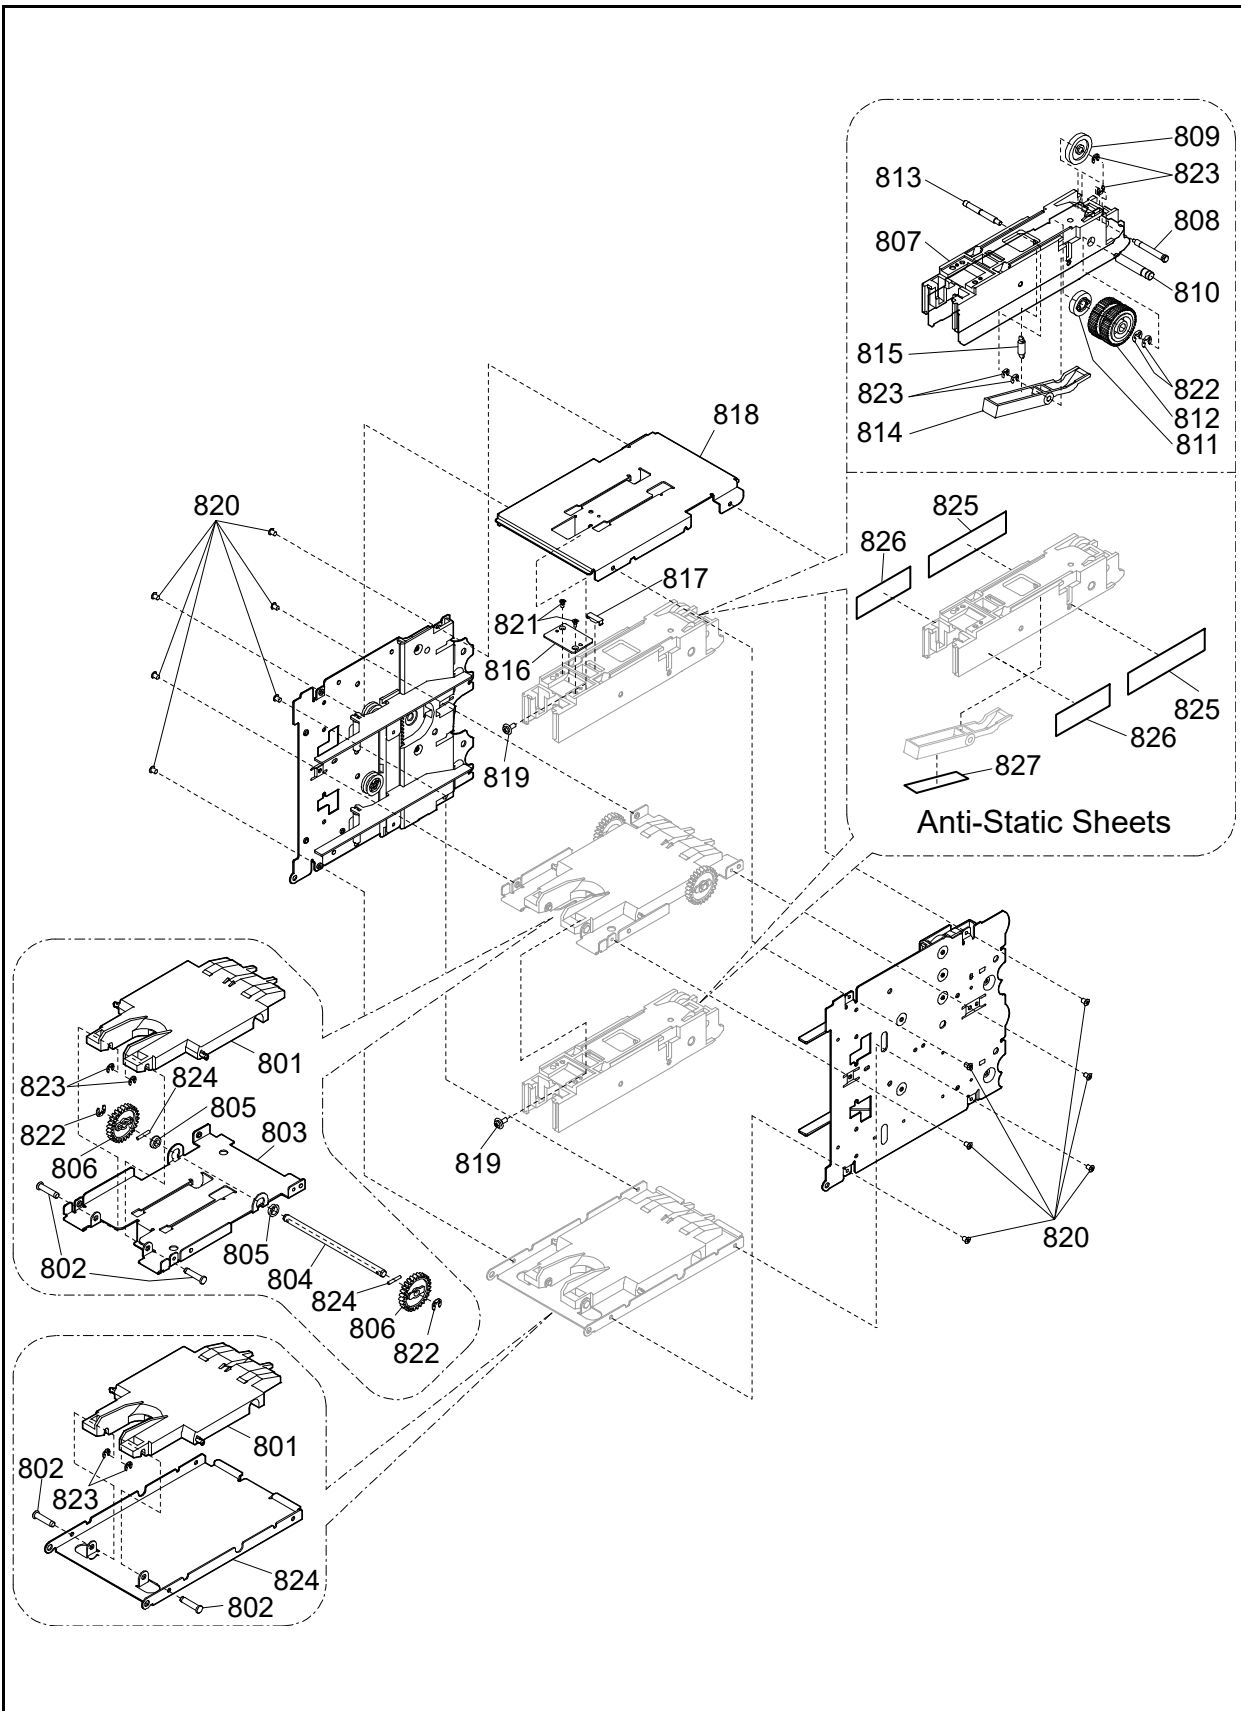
iPRO-RC Recycler Unit 3 Exploded View
